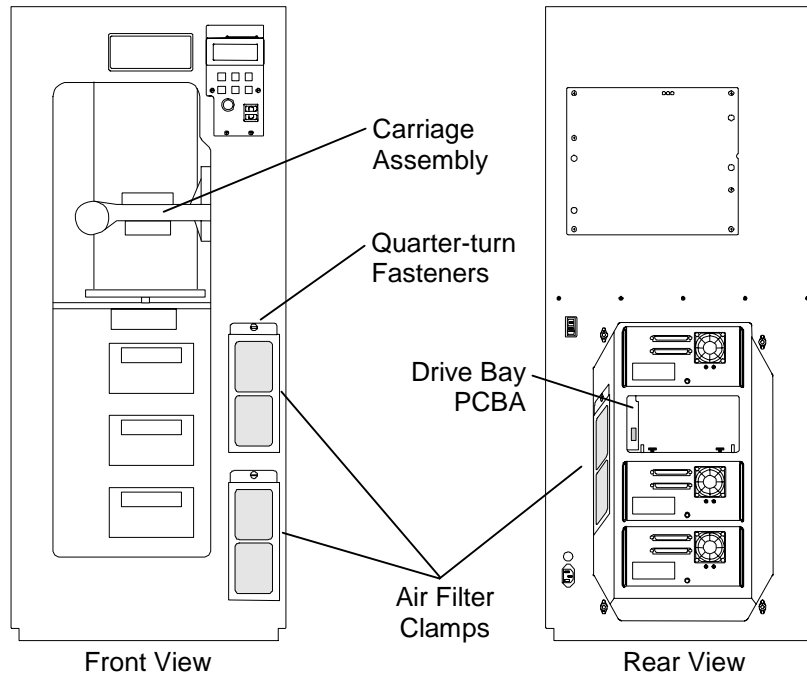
TLS Front and Rear Views - 6460 Model Shown with Rear Access Cover Removed
